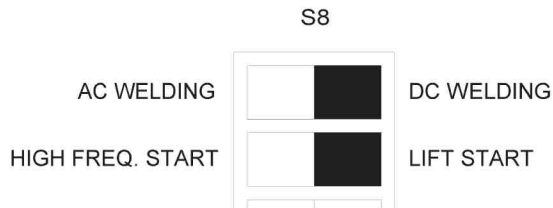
LIFT-START START MODE AND DC WELDING
